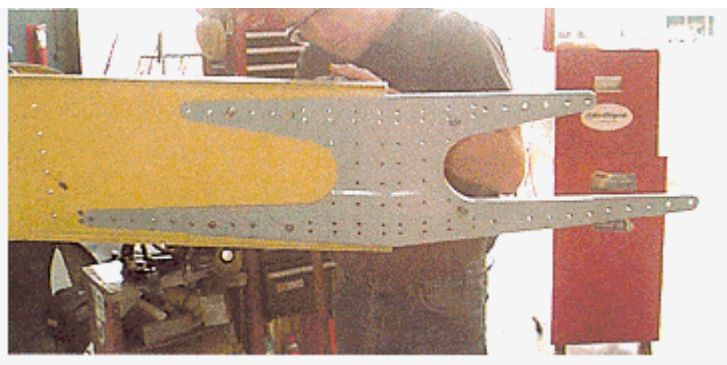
Rear view of the main spar, center butterfly splice plates (P/N 20211-9 & -11) temporarily installed. Transfer drilling operations on the butterfly plates is complete. The mechanic is line reaming the holes to size.
